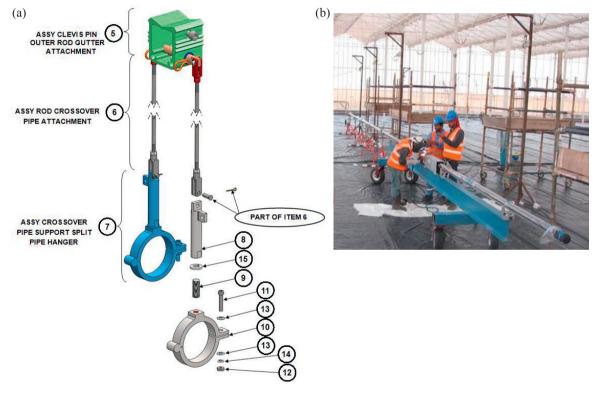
(a) Highly visual assembly documentation, (b) Receiver Weld Fixture and simple lift fixtures. 30m sections of receiver were welded and then hoisted into position and attached to overhead hangers
